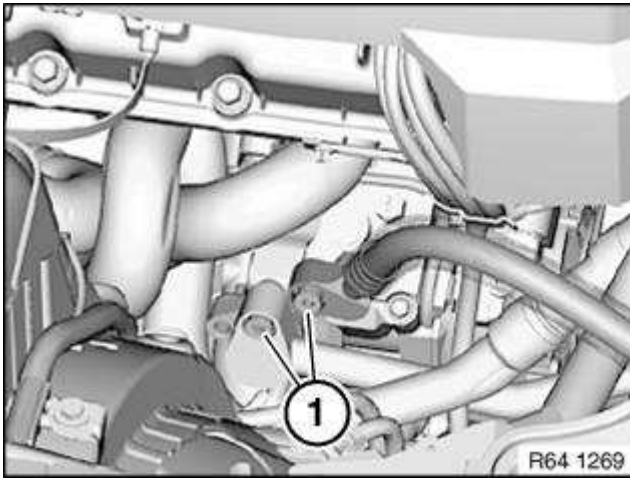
Release Screws (1) And Disconnect Plug Connection On Compressor
